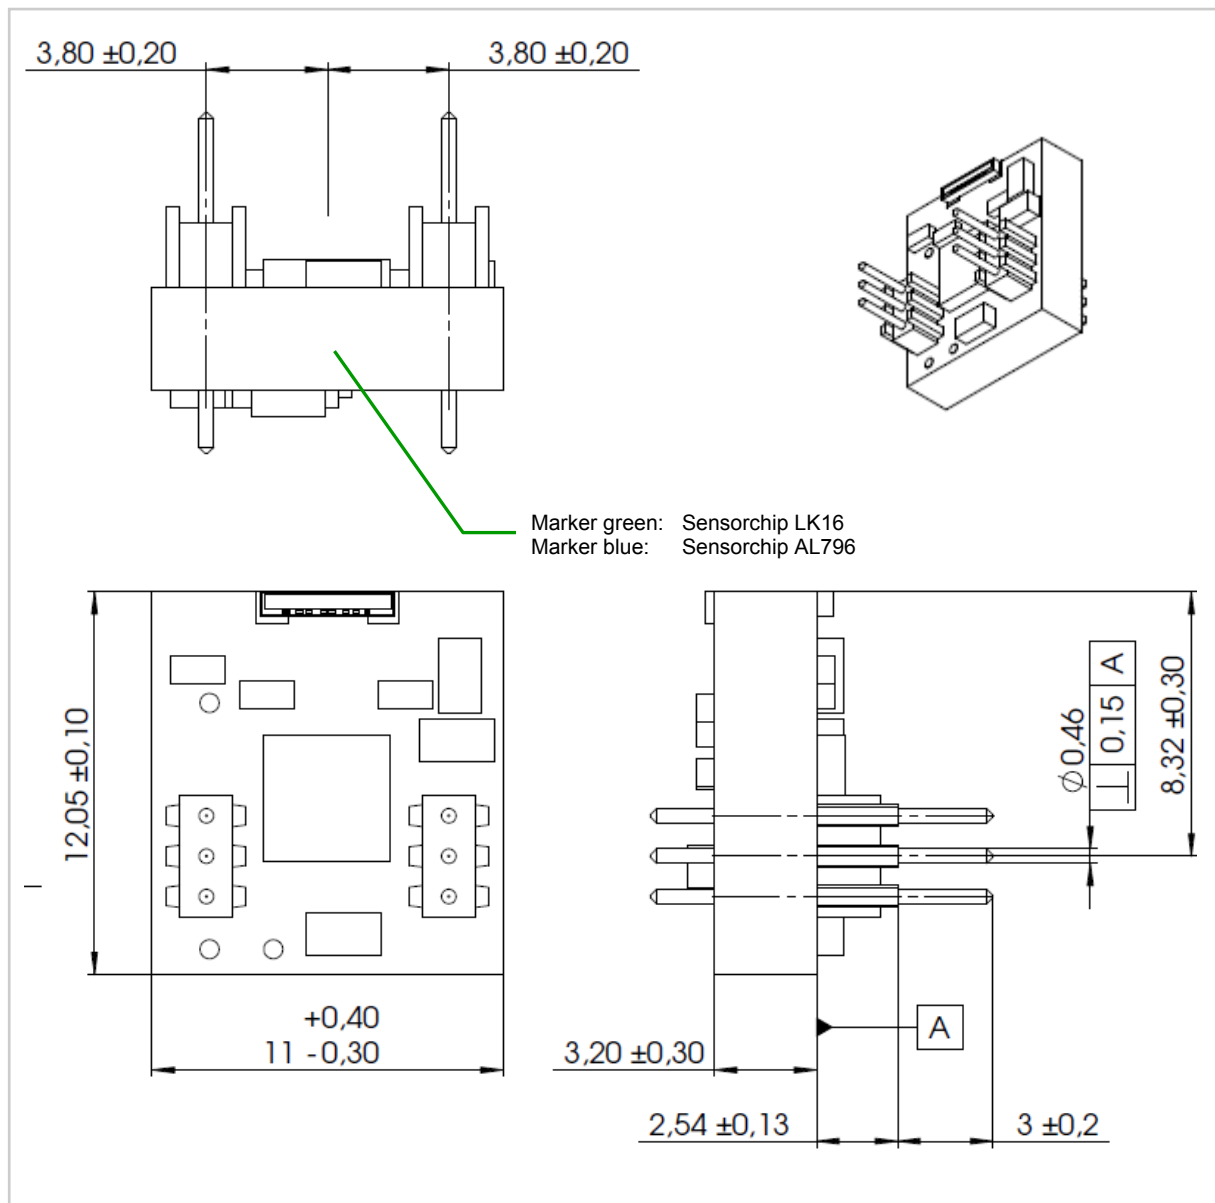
PCB outline (all dimensions in mm unless otherwise specified).
